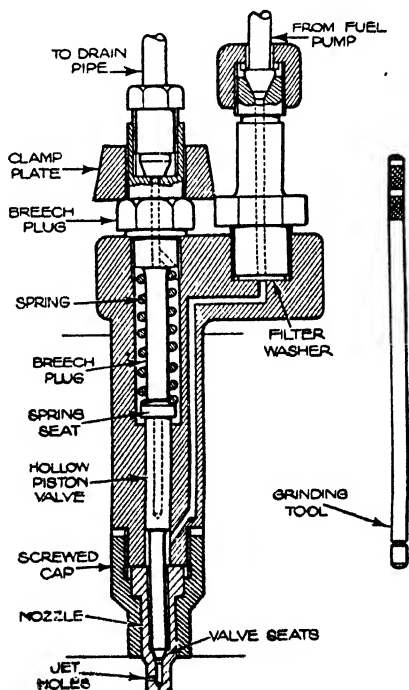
The Gardner Multiple Jet Sprayer and (on right) Tool used for grinding purposes.
